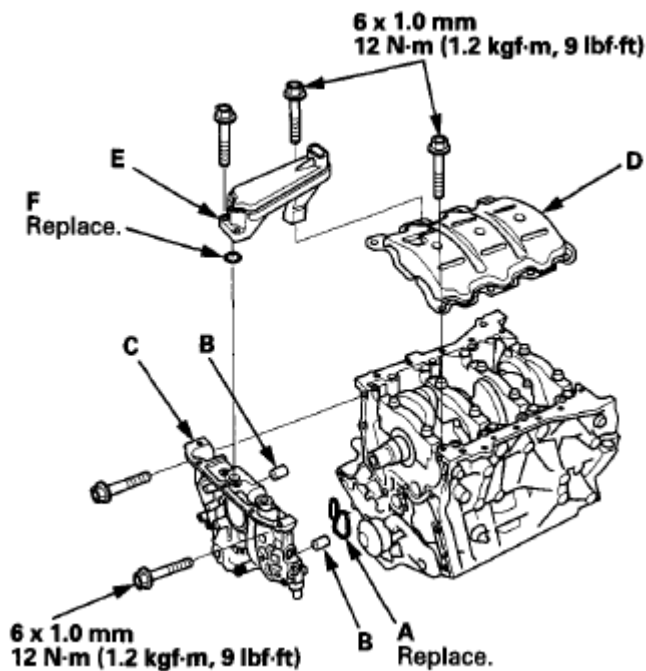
Identifying Crankshaft Oil Seal And New O-Ring With Torque Specifications
